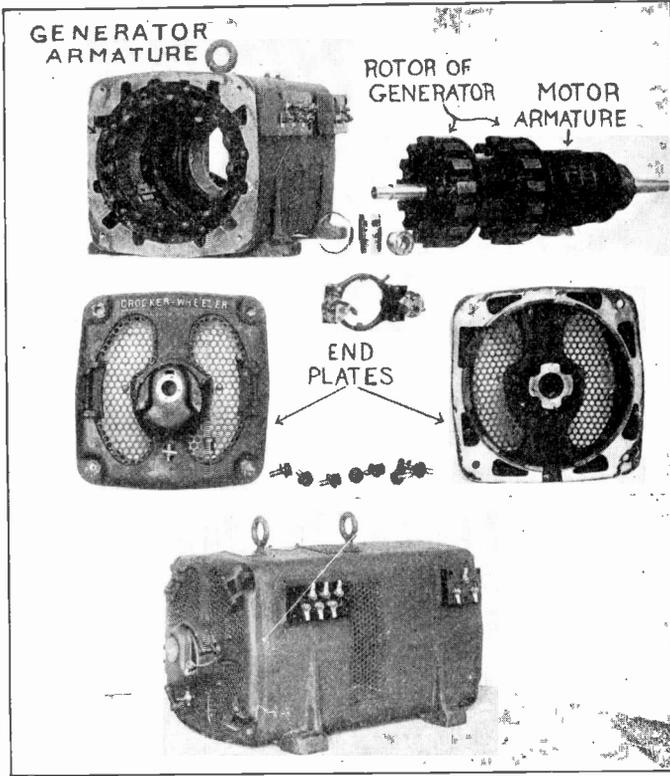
Exploded and Assembled Views of a Two Kilowatt, Five Hundred Cycle Motor Generator of the Inductor Type.
